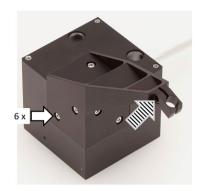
The fixed fiber holder with 5 or 6 visible mounting screws.
